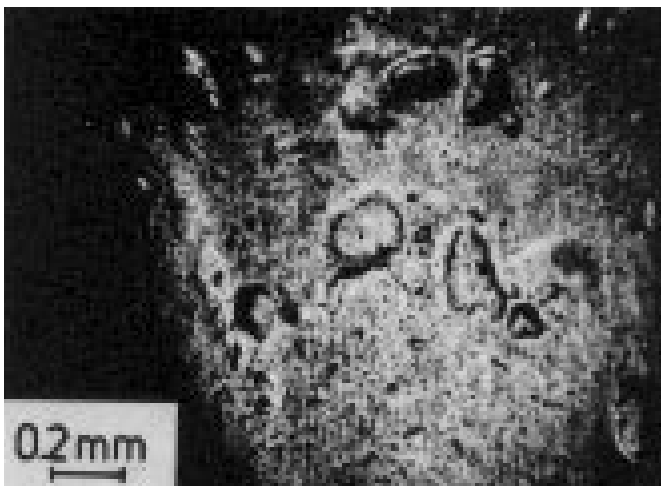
Raceway of inner ring of ball bearing after 130 hours of test
